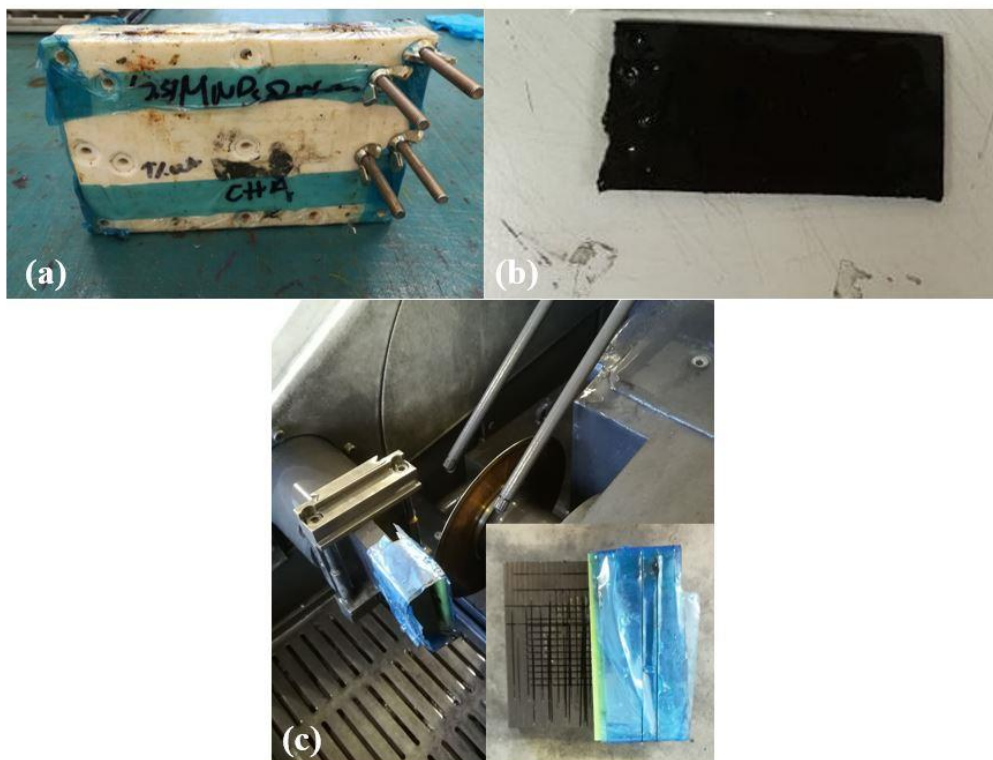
2. PTFE mould used for the casting process of the second epoxy system (DGEBA) (a), an example of 1 wt. % FLG-DGEBA based composite (b) and the diamond cutting tool (c). The inset shows the way that the sample loaded on the holder in order to avoid any cracks on the samples' surface during the cutting process.
